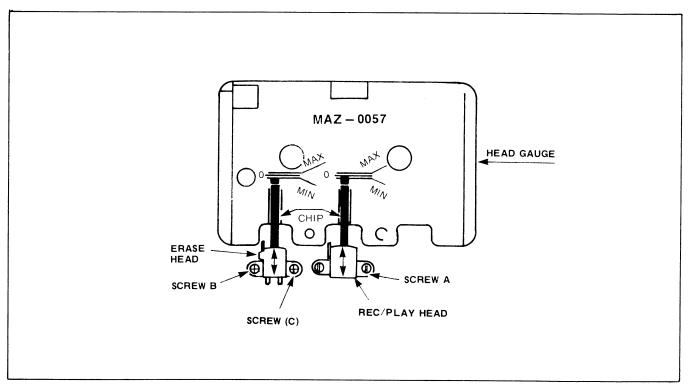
Figure AX. Head Lateral Clearance Adjustment for the Play/Record Head and Erase Head
